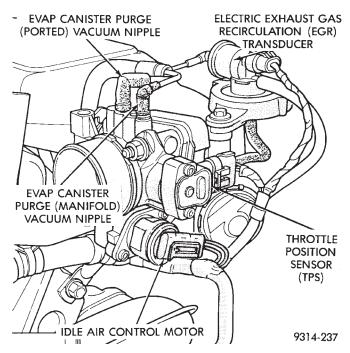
Electrical and Vacuum Connection to Throttle Body
